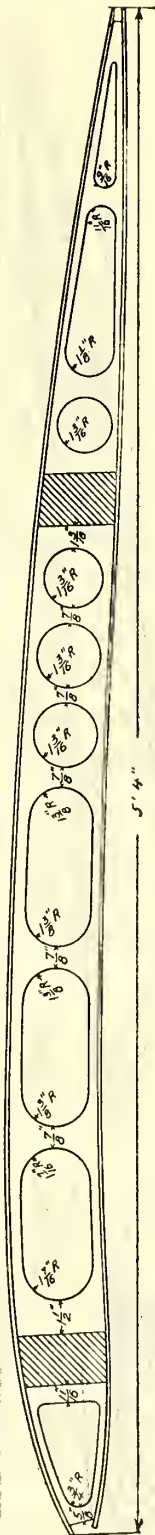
Circular opening type wing rib for DH-4 machine.
